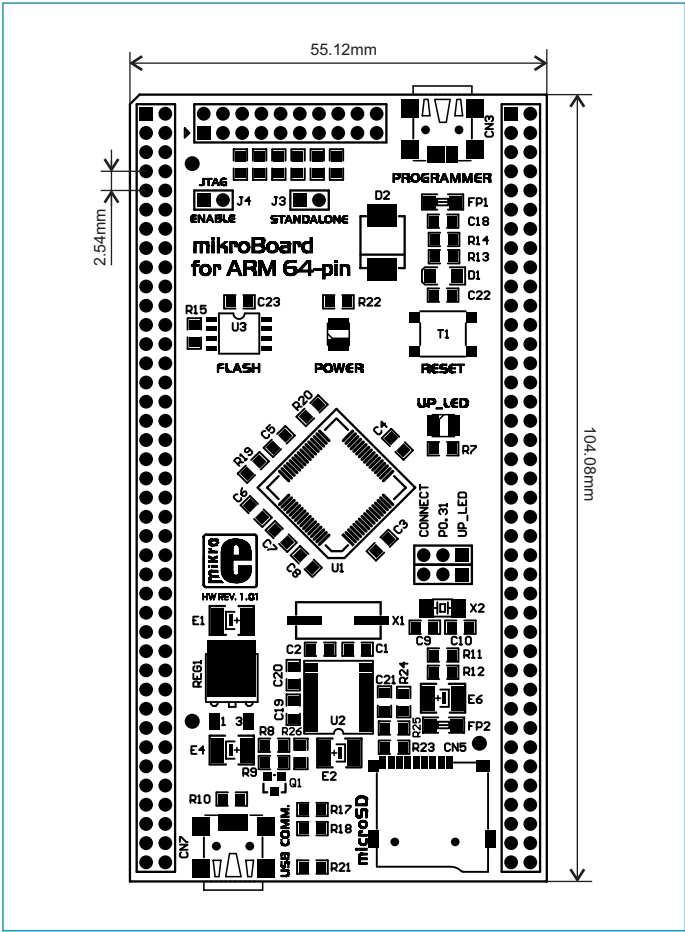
Dimensions of the mikroBoard for ARM 64-pin
